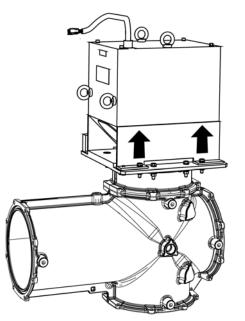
Removing the fixing bolts at the voltage transformer mounting plate
